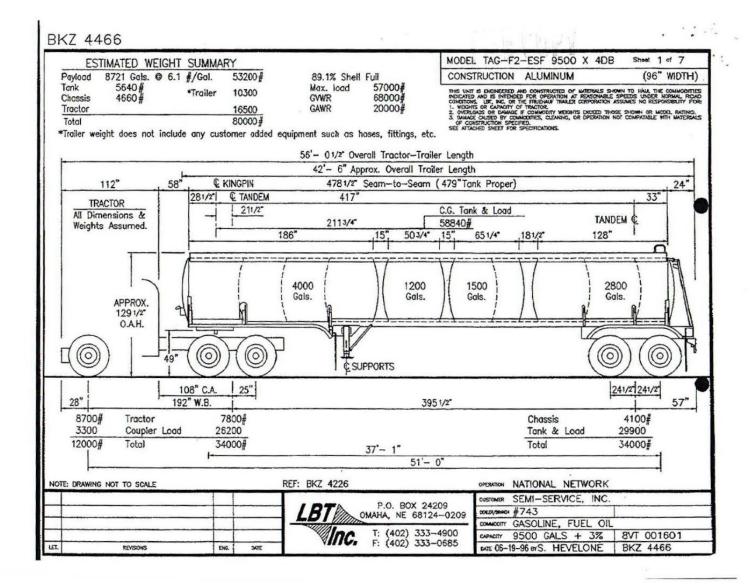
Trailer Dimensions, Test No. MTL6-1
